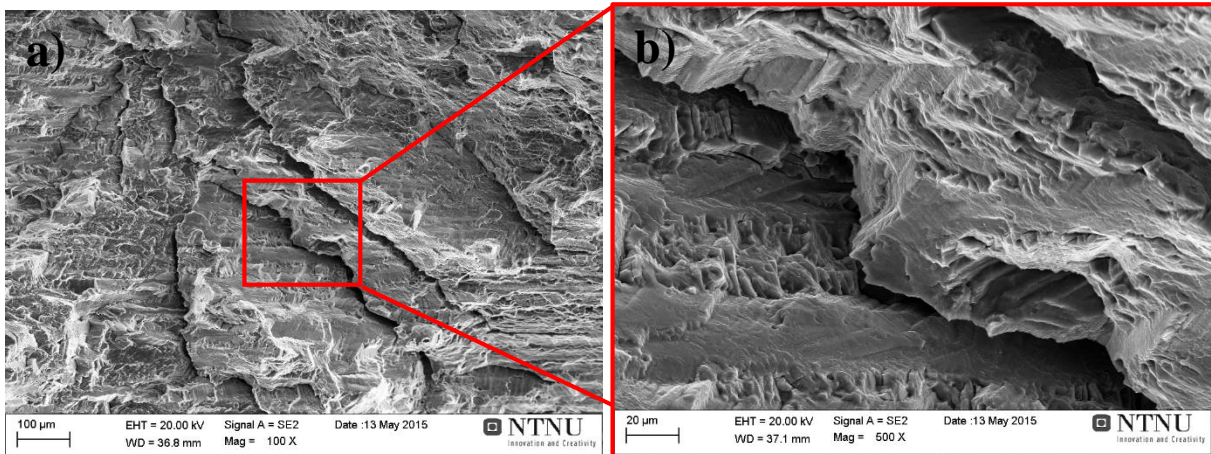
A crack, possible from machining of the fatigue specimen, 100X magnification.
